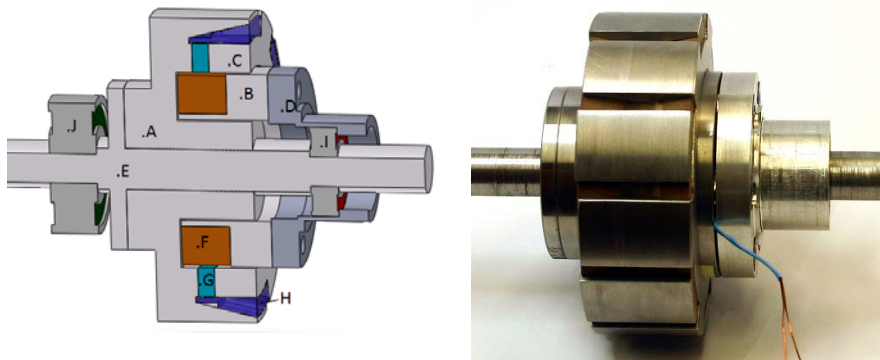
a) Cad drawing of the prototype rotor. b) The manufactured rotor prototype
